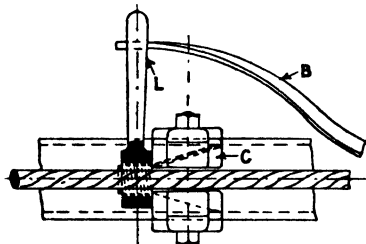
&amp; 1046 FIXED AND HAULING CABLES
